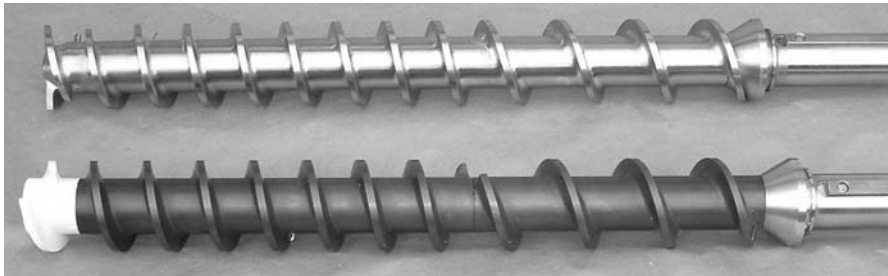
Full ceramic extrusion auger (H.C. Starck) and steel auger
